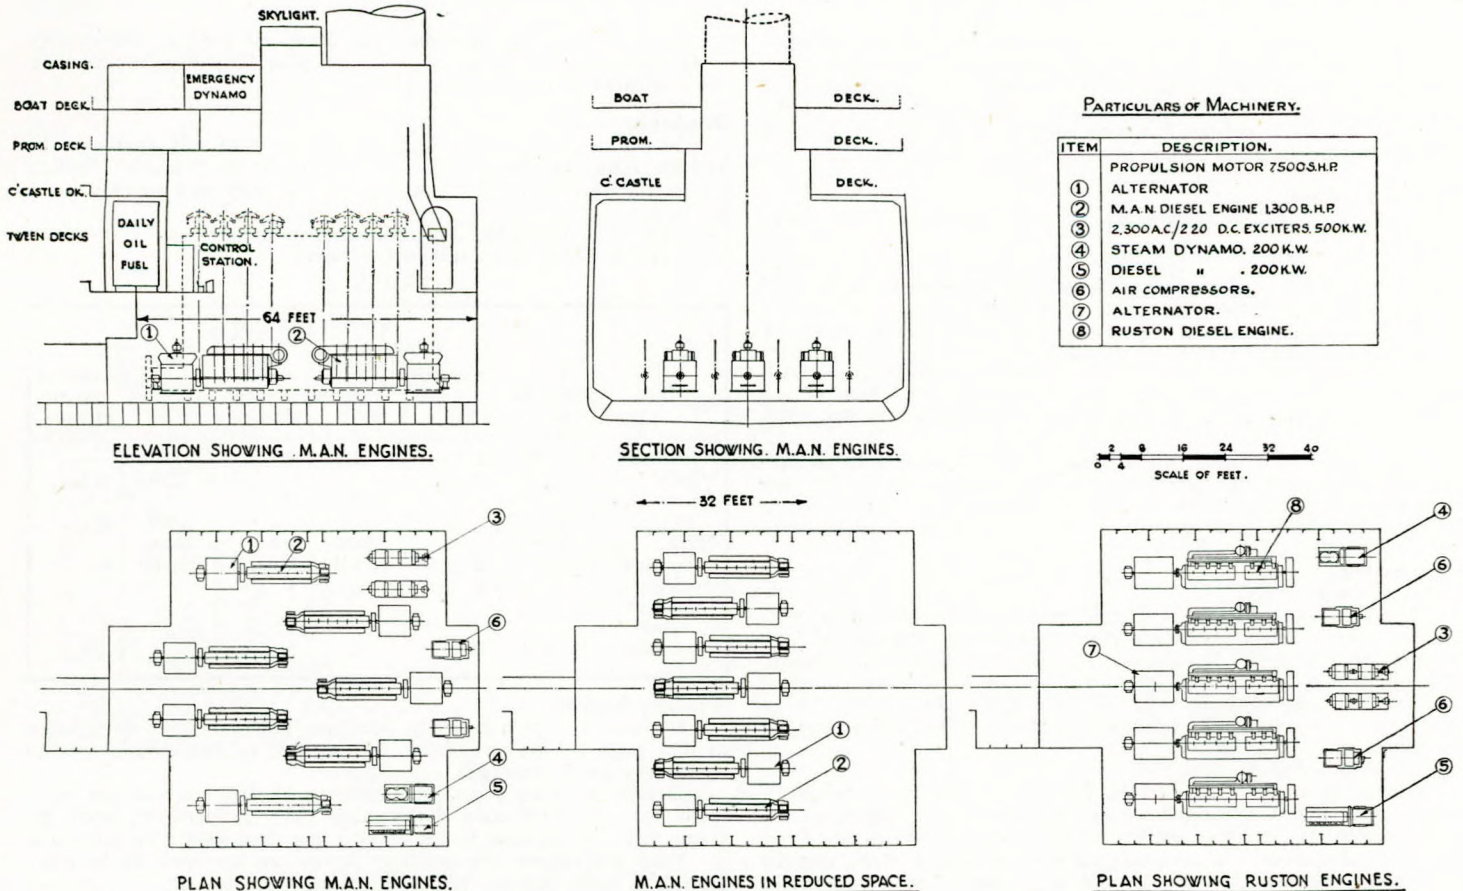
Arrangement of 7,500-s.h.p. propelling machinery in refrigerated cargo liner.
